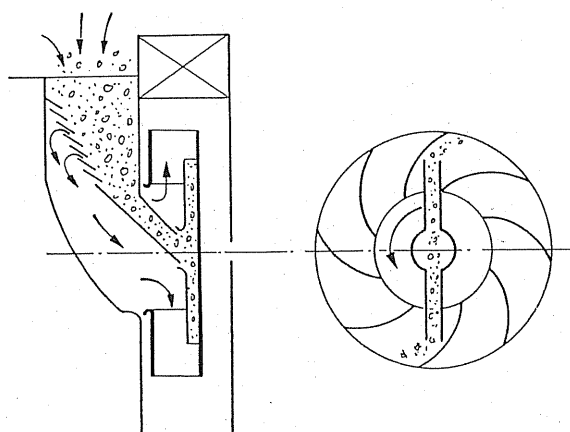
Fan for separation of corrosive material in a special replaceable blade strip.
